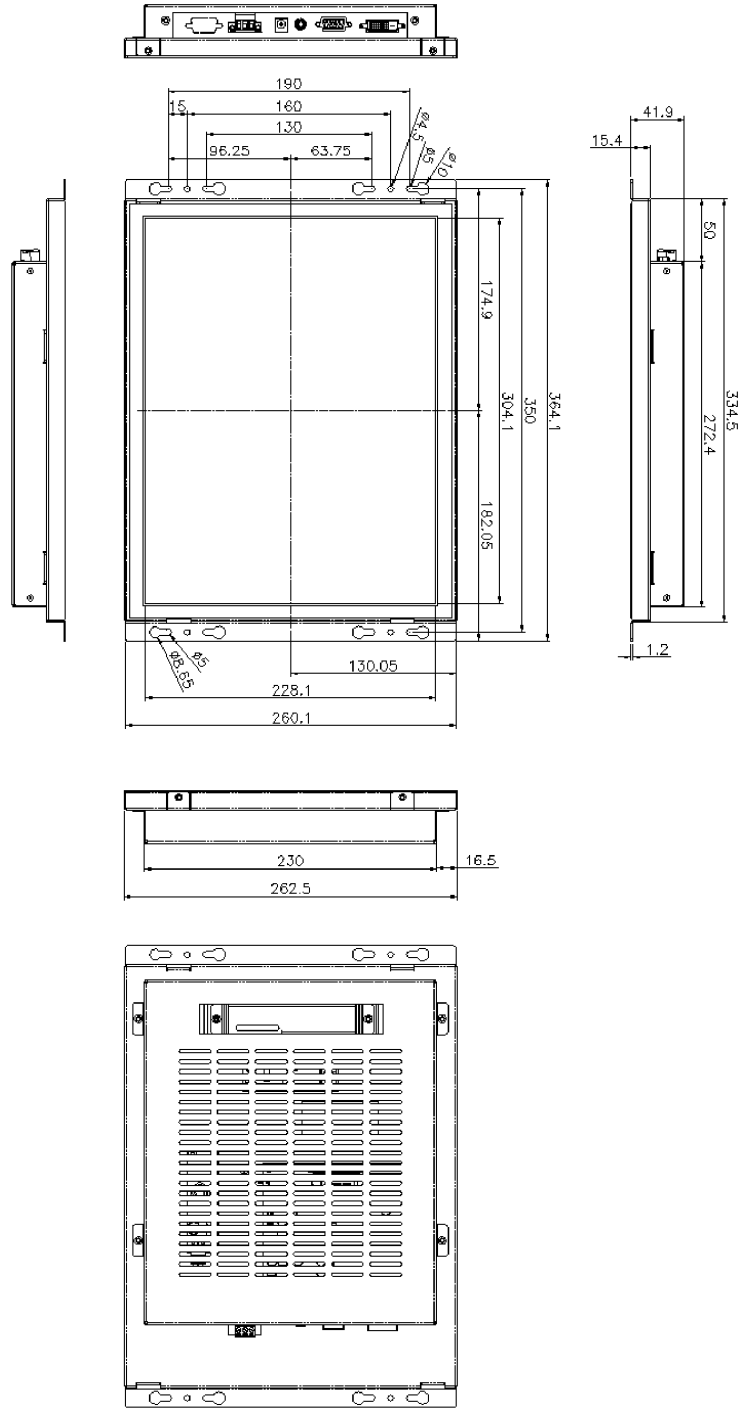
2007606 Physical Dimensions (millimeters)
